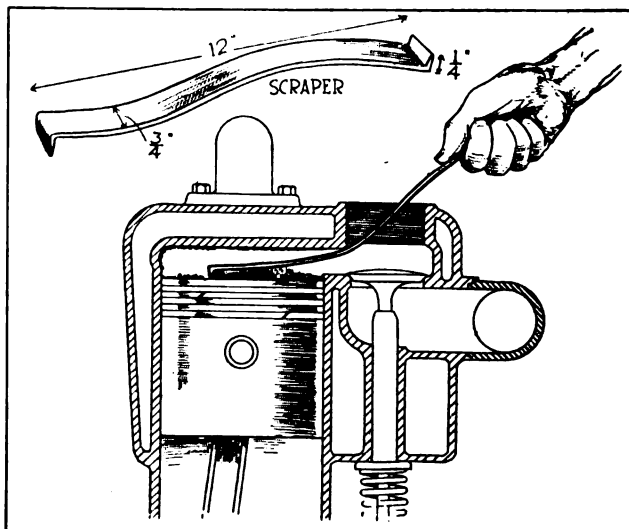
A scraping tool should be used to loosen carbon remaining after the first burning
